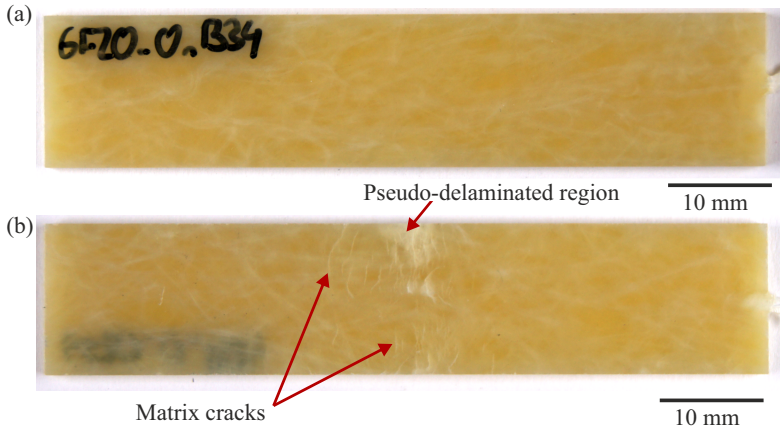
(a) Compression-loaded side and (b) tension-loaded side of a DiCo SMC specimen tested under bending fatigue load at 31% UFS^F after $2.6 \cdot 10^6$ cycles.
